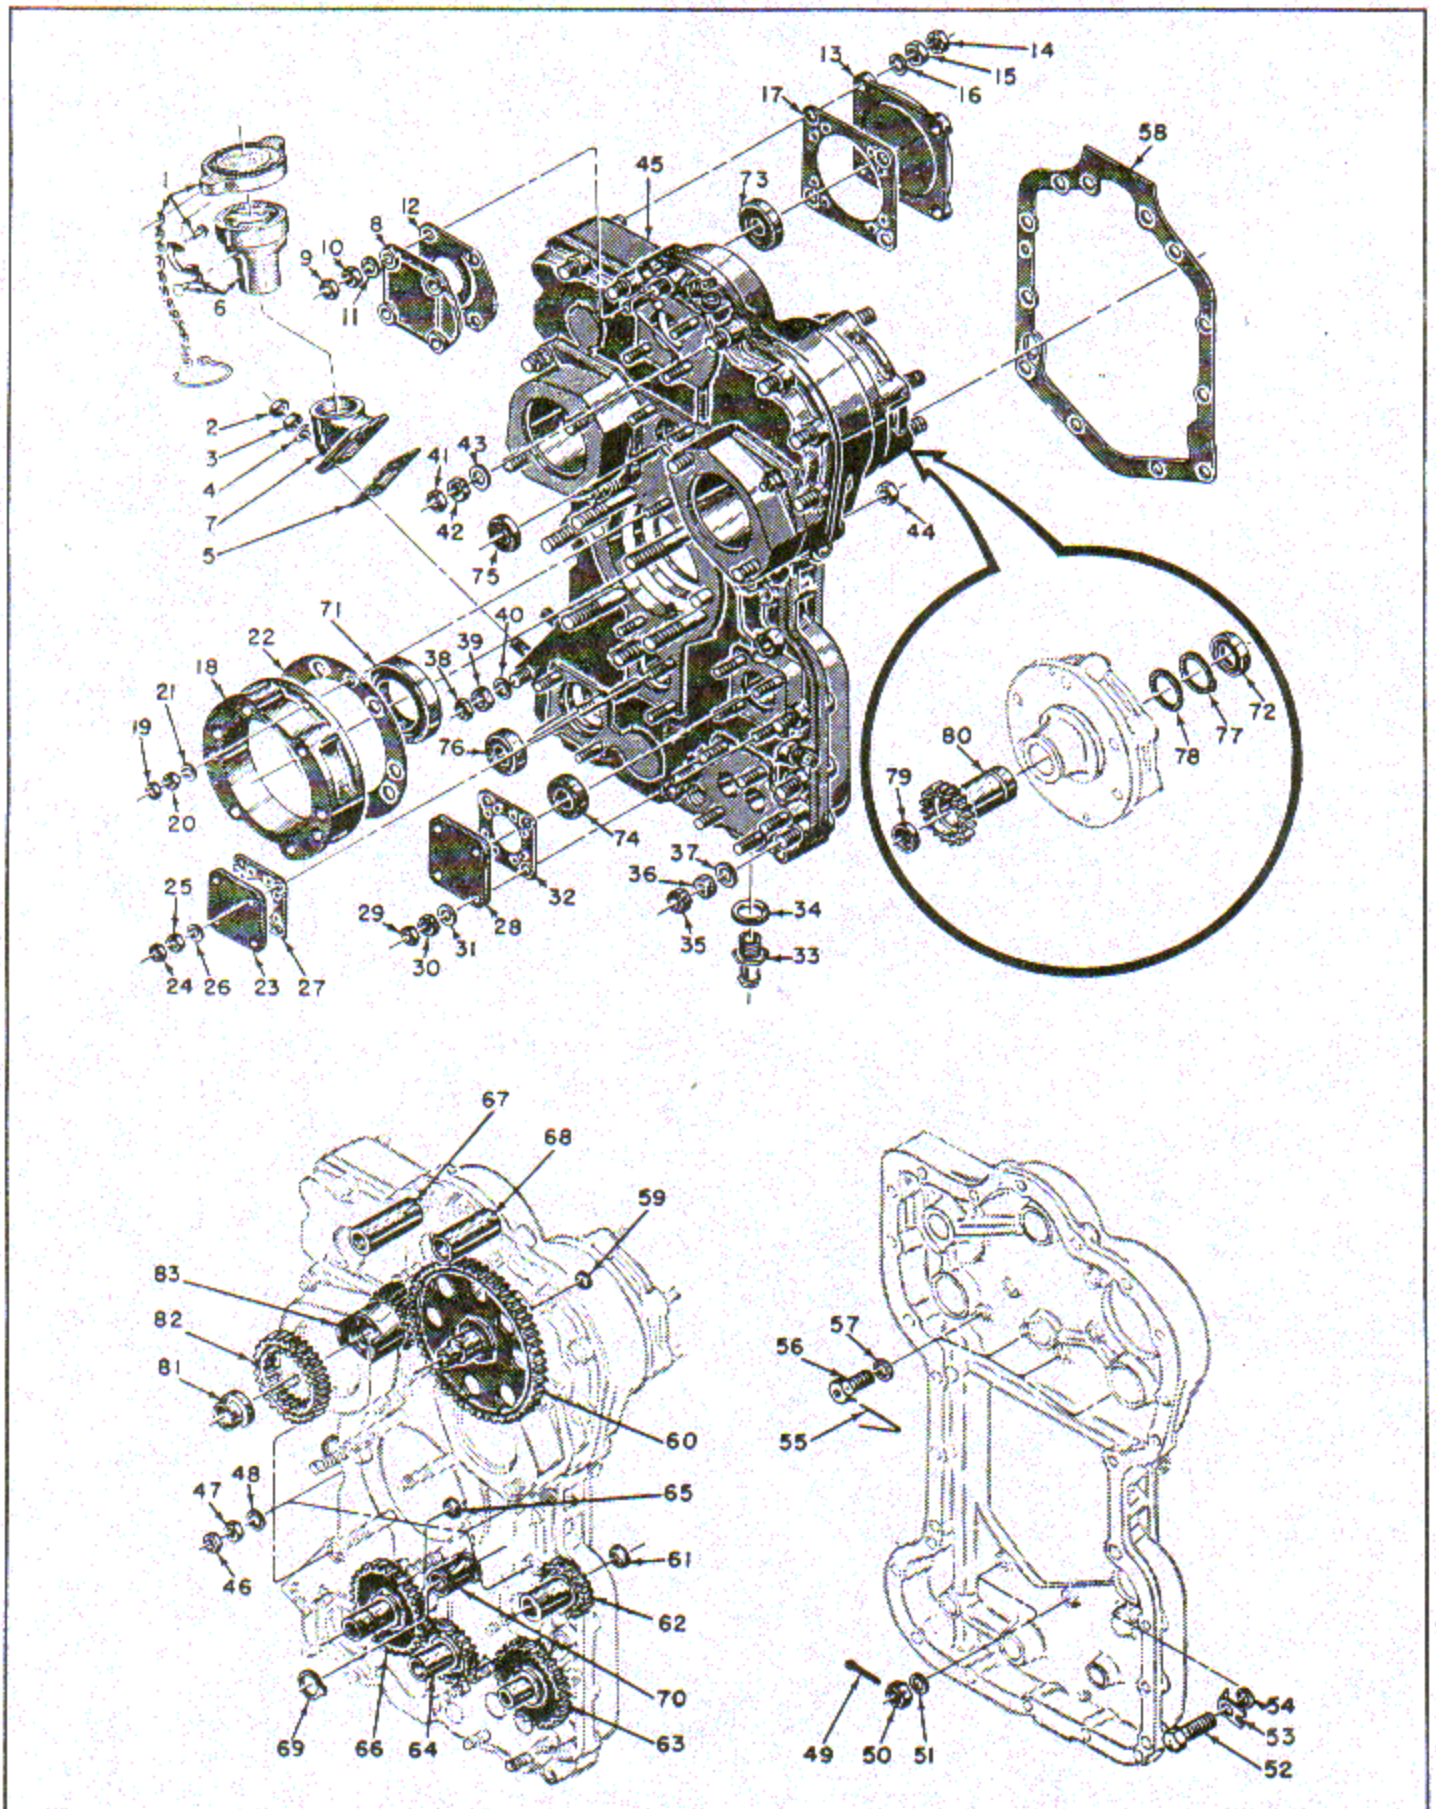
View of Accessory Case (Sheet 2 of 2)
